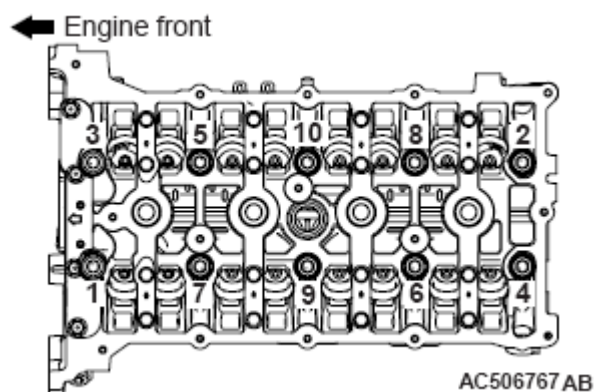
Identifying Loosening Sequence Of Cylinder Head Bolts
